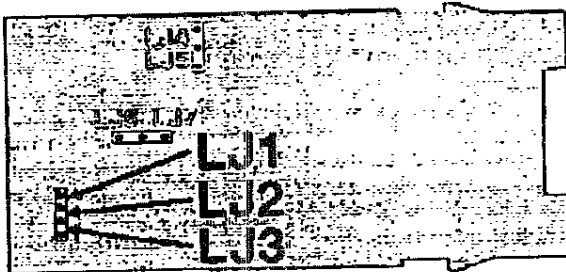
CPU PCB Link Jumpers (Relay/SSR Output 1)
